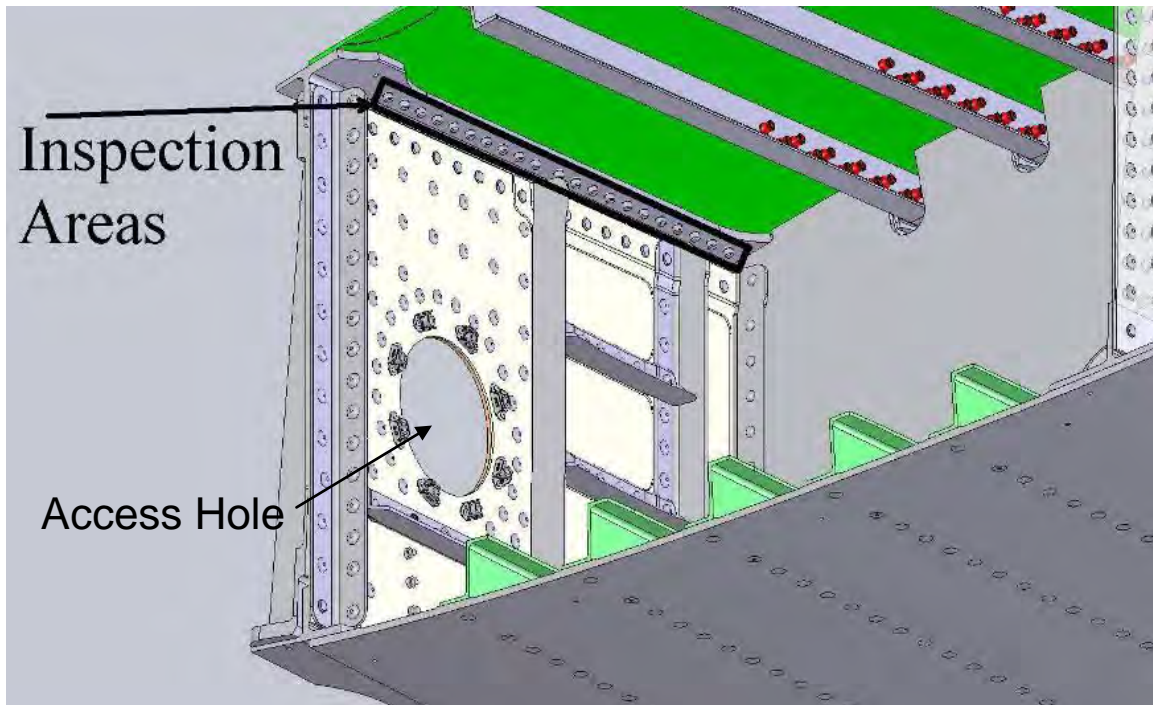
CAD view of the A10 cavity showing the inspection areas for the alternate inspection. The tool was successfully designed to be able to reach this area as well as the primary inspection area on the lower wing skin.
